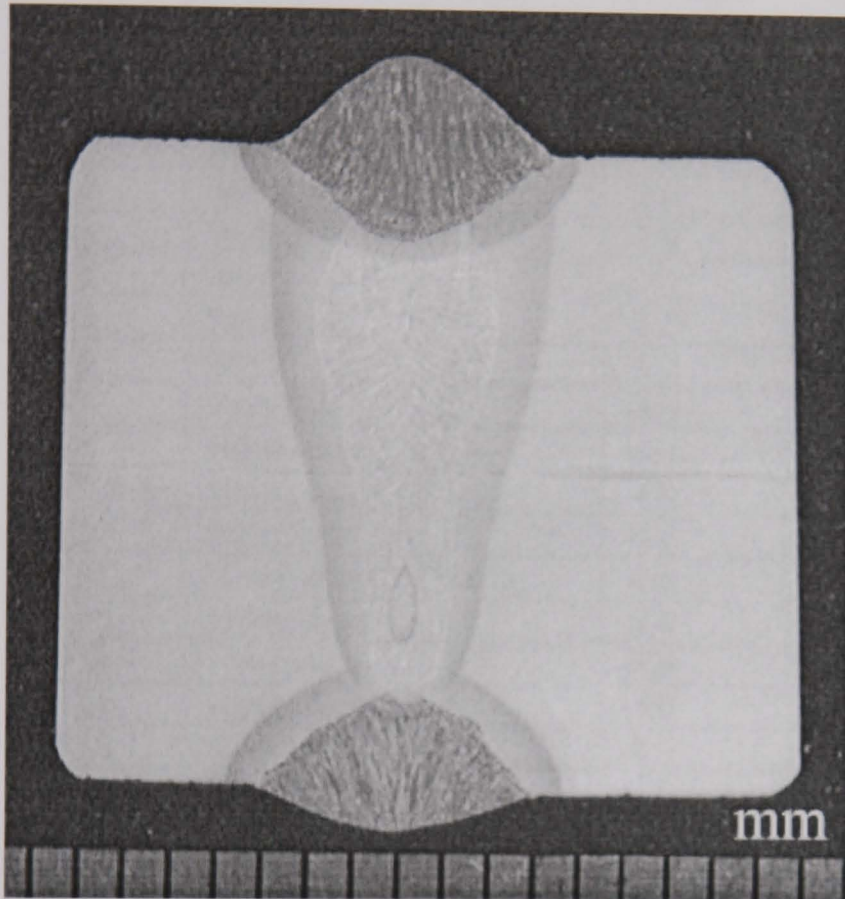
Joint preparation used to evaluate the laser welding of pipe sections of 914mm pipe OD.
